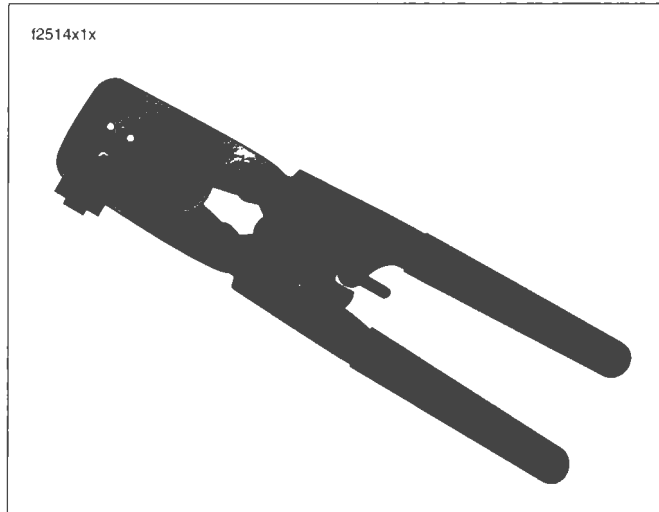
Packard Micro 64 Terminal Crimper (Part No. HD-45929)
